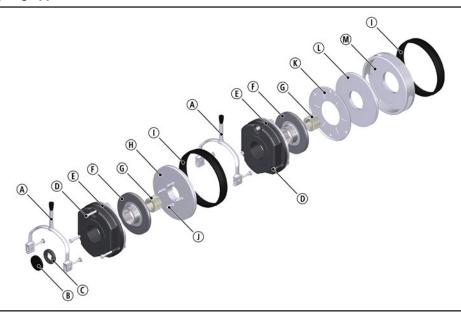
Double spring-applied brake INTORQ BFK458-06 to 25
